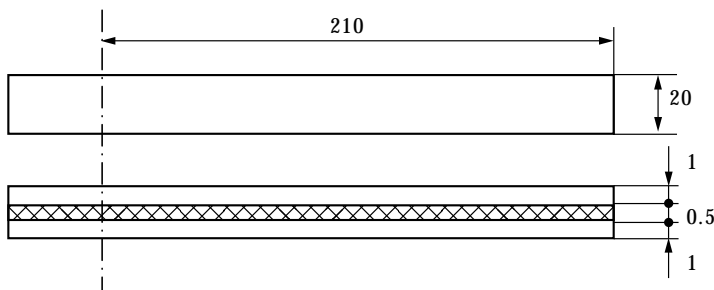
Continuous cantilever sandwich beam tested (unit: mm)
